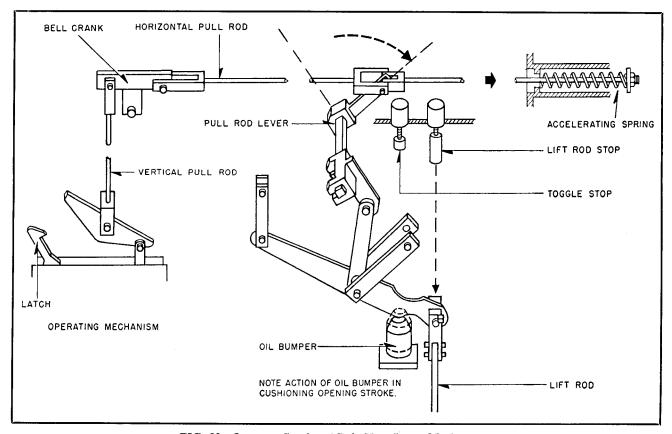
Opening Stroke of Pole Unit Lever Mechanism
